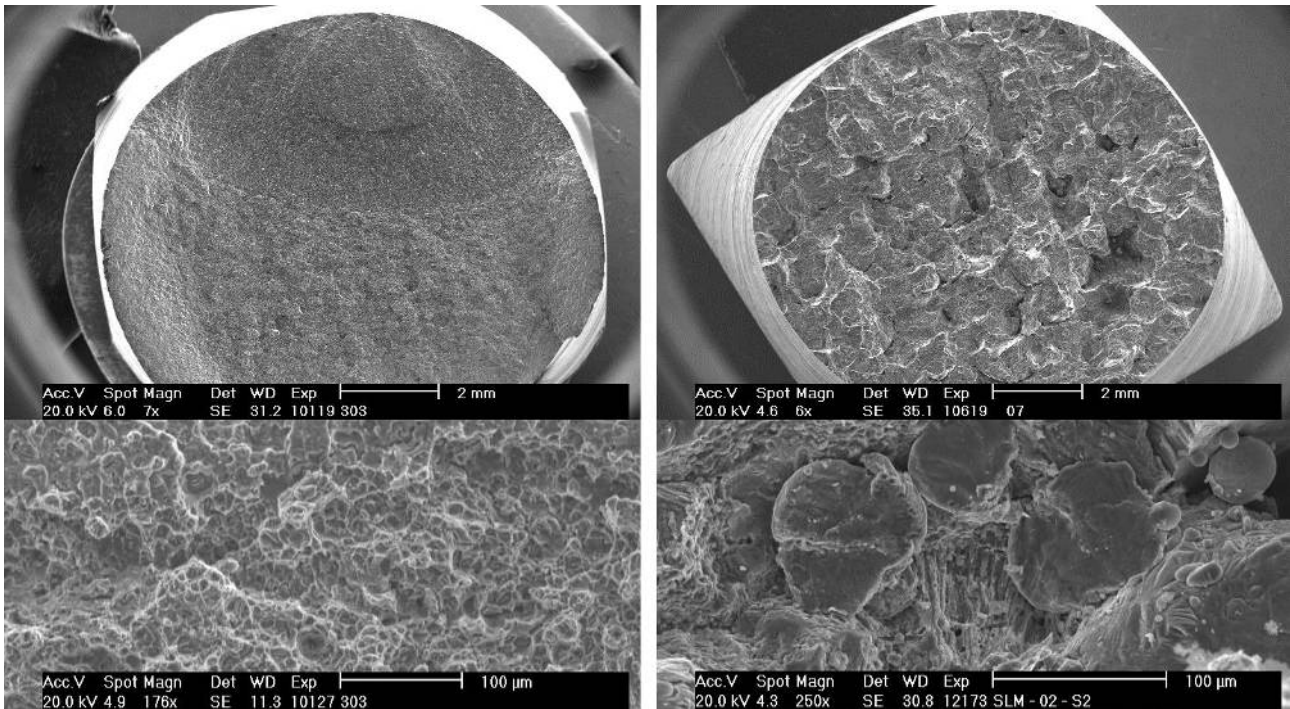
Fracture surfaces of reference (left) and SLM material (right)
